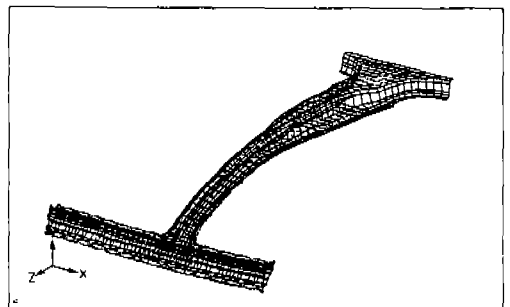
Detailed shell model of a center pillar with the roof-rail joint.
